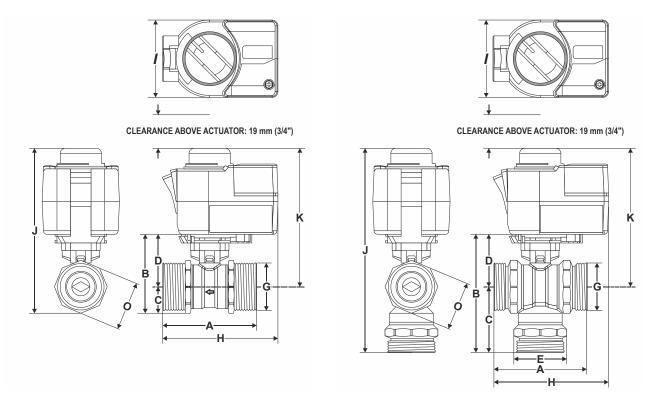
MVN with 2-way ball valve (see also Table 3)
